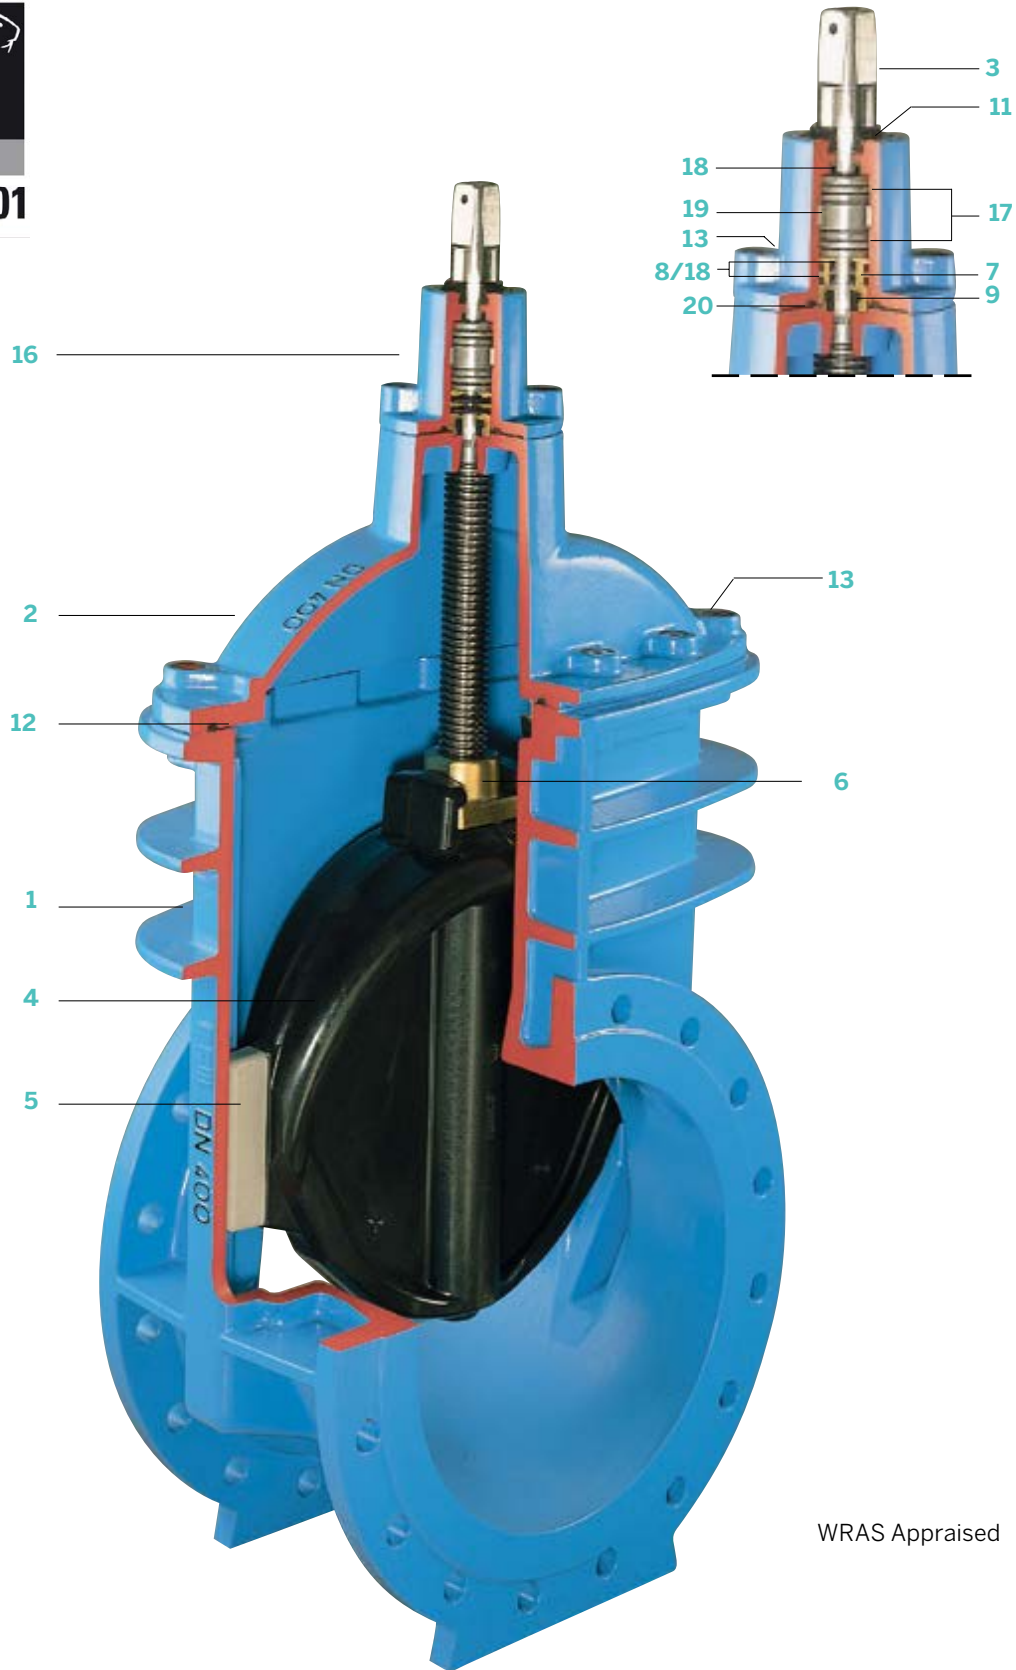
E2 Valve Flanged Ends DN 250 – 600
